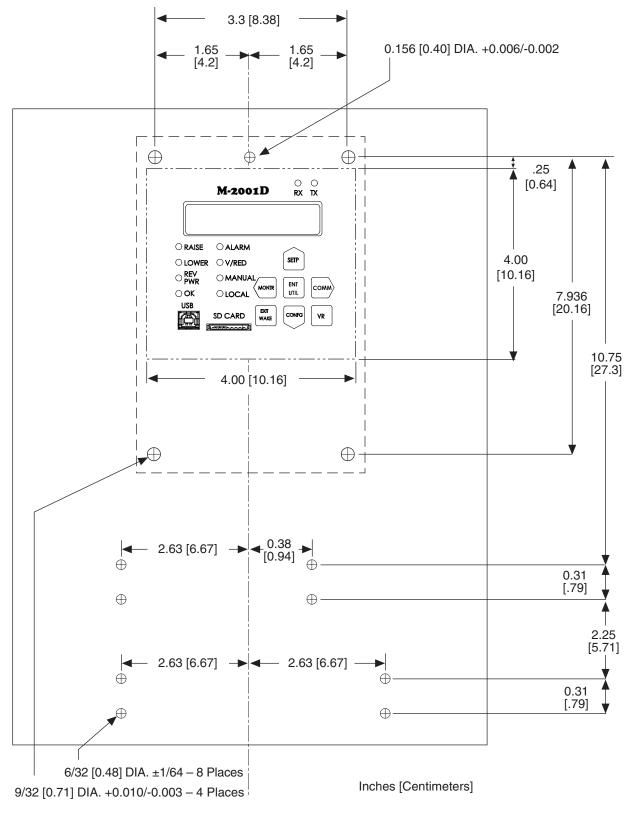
M-2052 Panel Cutout and Hole Drill Dimenstions
